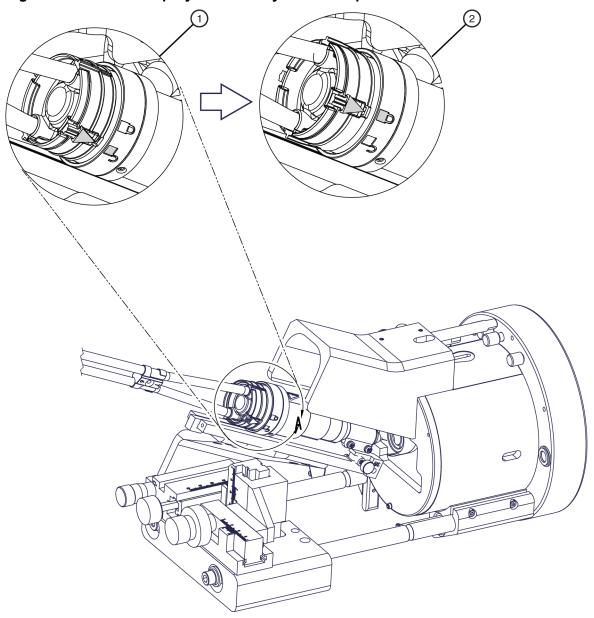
Lock the Sprayer Assembly in the Adapter
